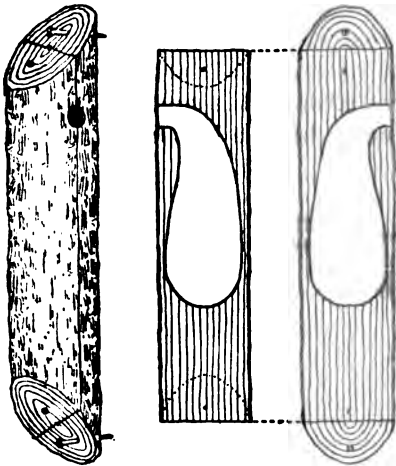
Log split and halves marked to be gouged out to form a cavity. Halves to be screwed together. Top should be covered with tin or zinc.
